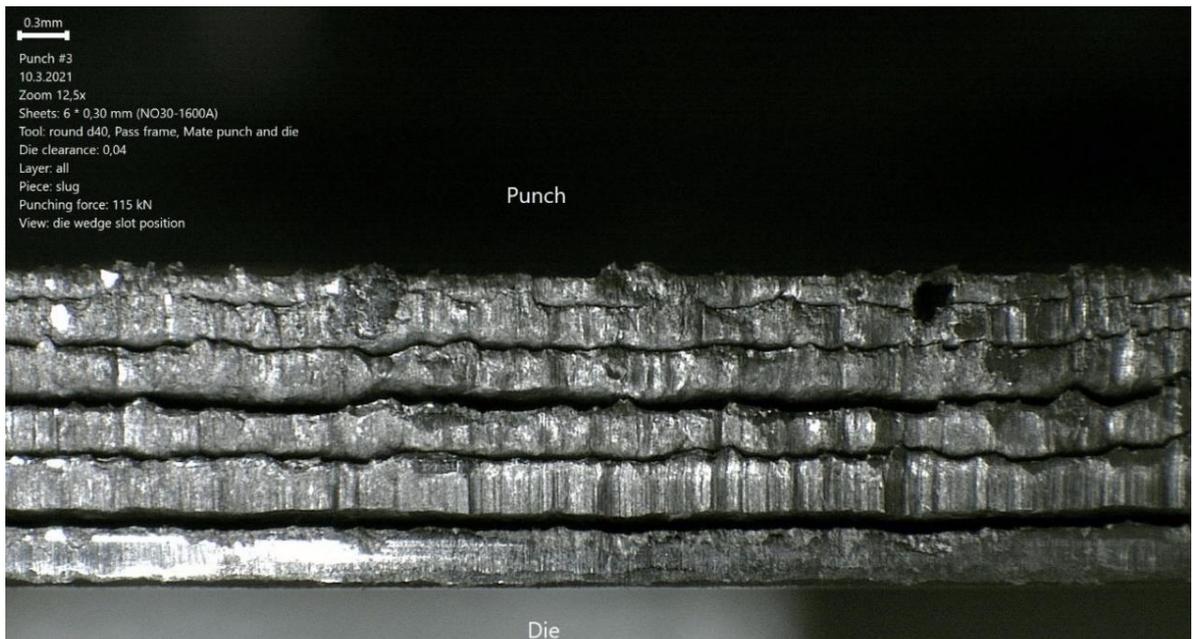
Stack of six NO30-1600A sheets, die clearance of 0.04 mm. The material has transferred rather lot between layers 1 – 3. Seems that only the bottom layer has penetration zone and after that the fracture zone starts. Top level has some burrs.
